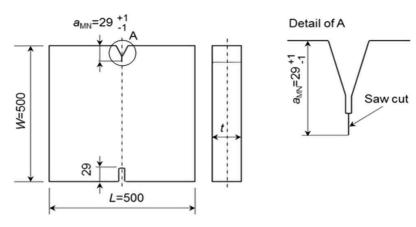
Test specimen dimensions for an impact type specimen
